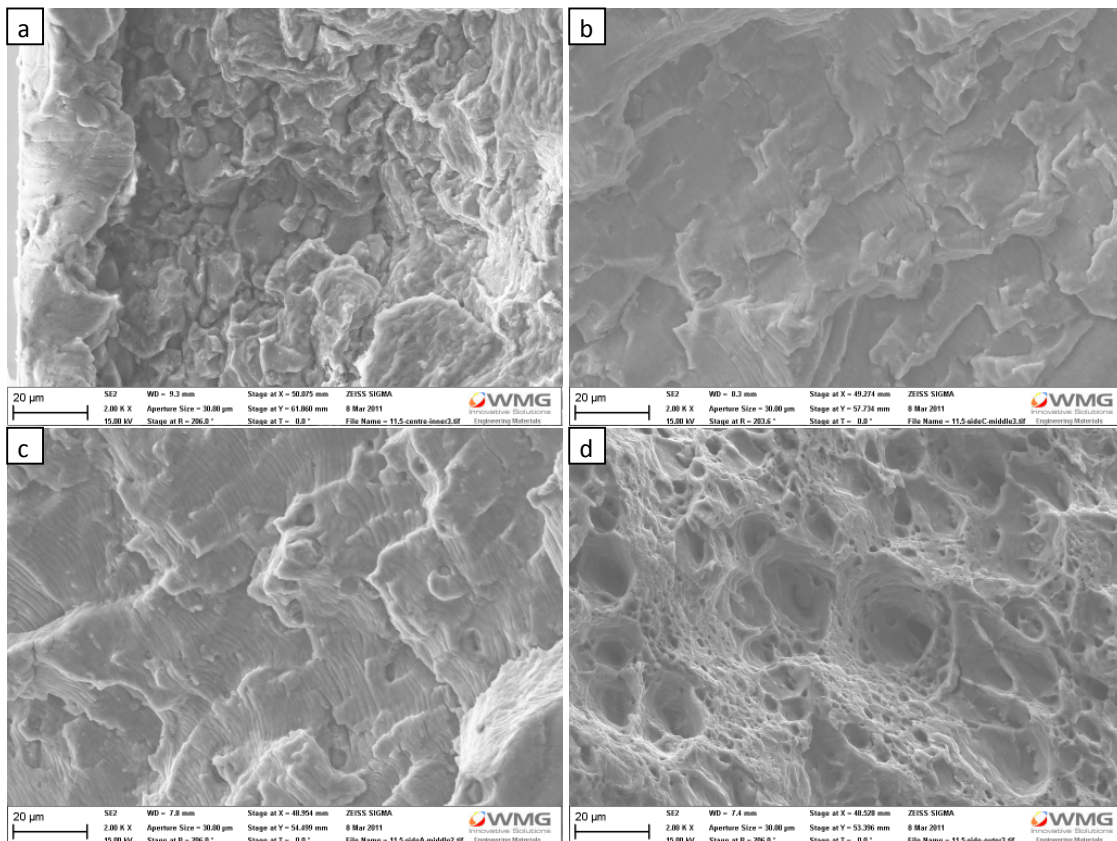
The SEM images of the fracture interface of a lap shear specimen with the edge distance as 11.5 mm after the fatigue, a) crack initiation, b) and c) crack development and d) sudden break fracture interface [106].
